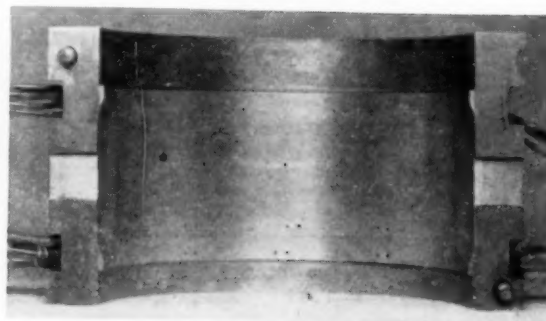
VIEW OF TEST-BEARING HOUSING, SHOWING INSTALLATION OF 4-IN. \times 4-IN. BEARING, MAGNETIC FILM THICKNESS GAGES, AND TORQUE ARM
